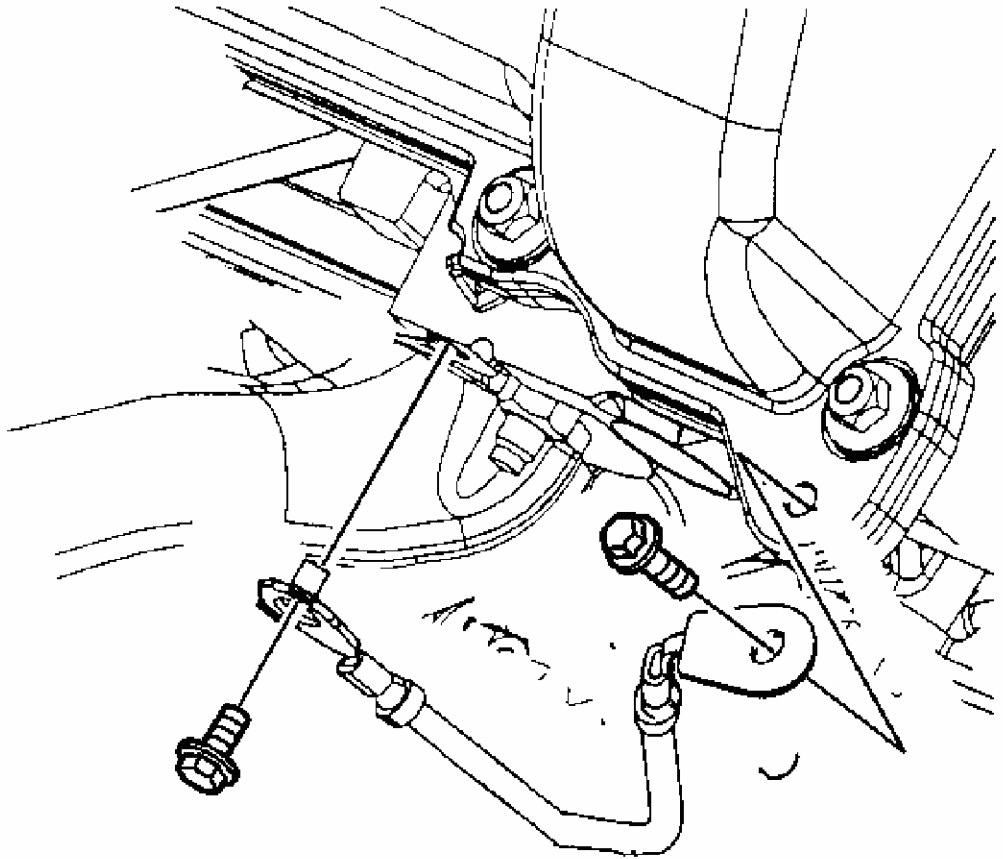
Identifying Ignition Coil Ground Strap & Bolt
